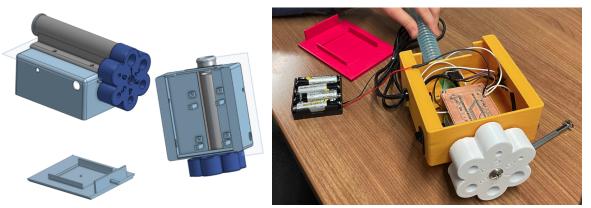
High-fidelity CAD design (left) and soldered PCB within enclosure (right).
